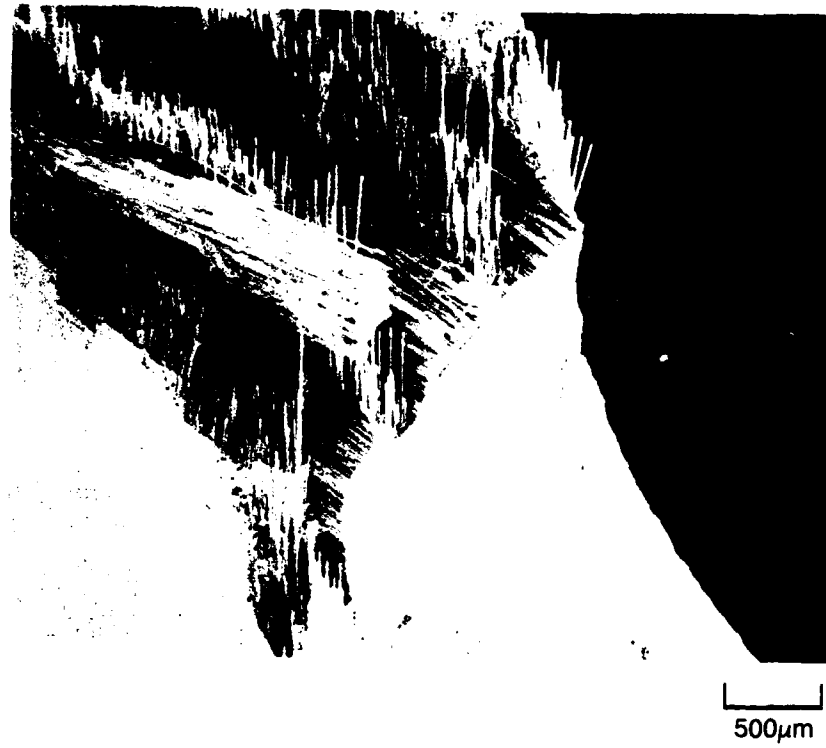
(c). Tensile Fracture Surface of 0/90° Reinforced 7740/HMU Composite with 6.4 mm Hole
